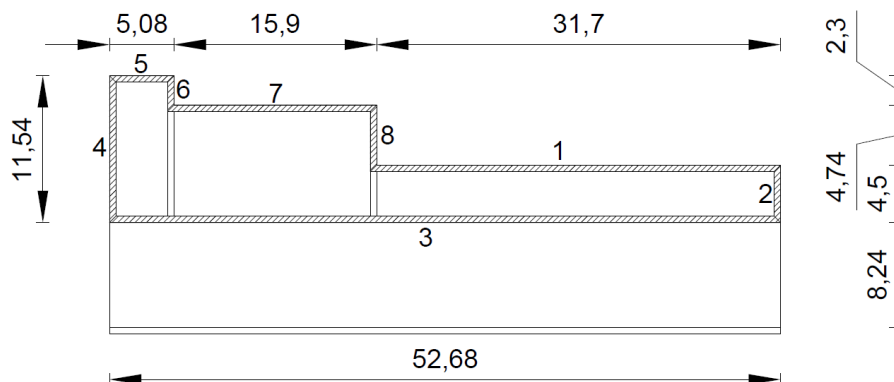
APPOINTED STRUCTURAL COMPONENTS CROSS-SECTION IN TRANSVERSE DIRECTION
